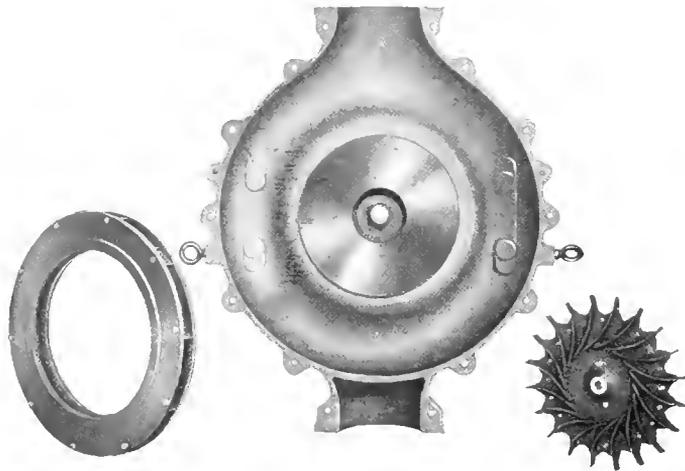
Impeller, Discharge Vanes, and Half Casing of Single Stage Compressor
